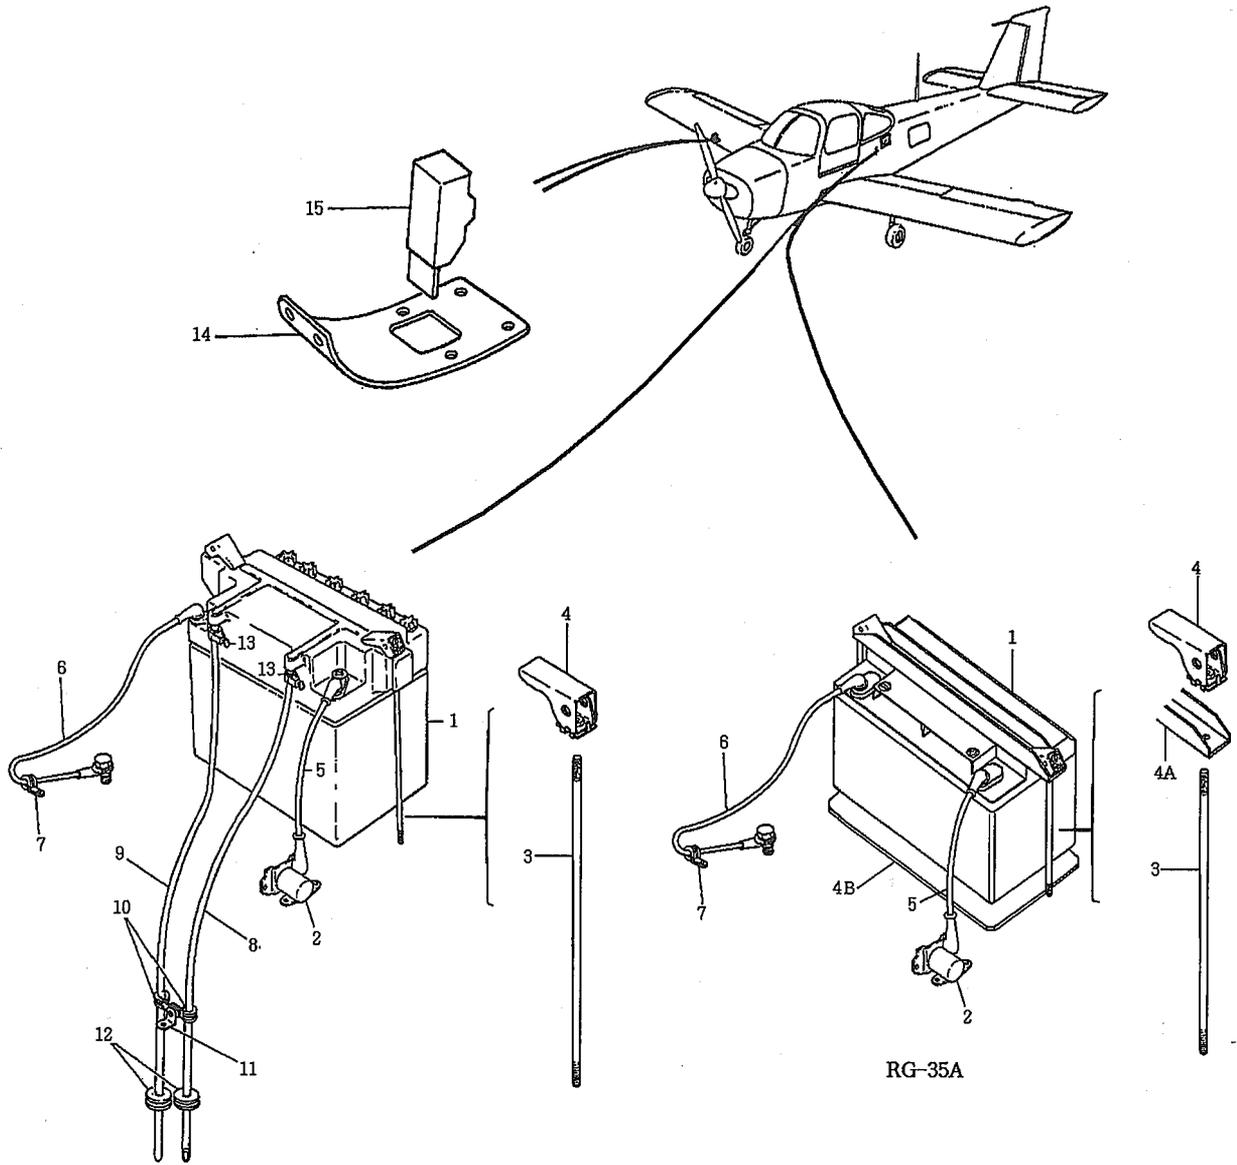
FUSELAGE AND WING ELECTRICAL SYSTEM INSTALLATION
